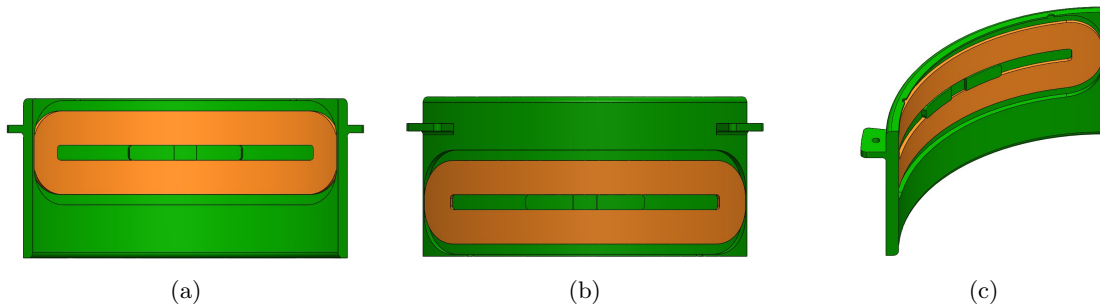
Windings subassembly: (a) inner view (b) outer view (c) isometric view.
